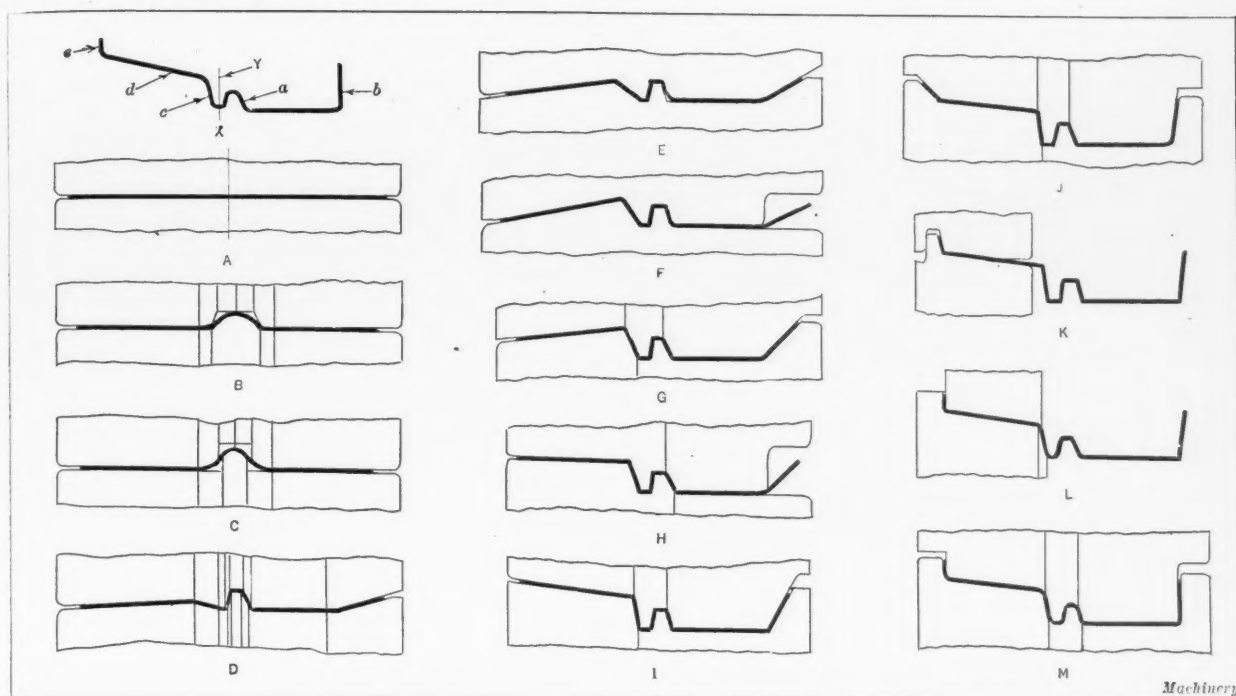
Successive Steps in forming a Sheet-metal Window-sill Section
